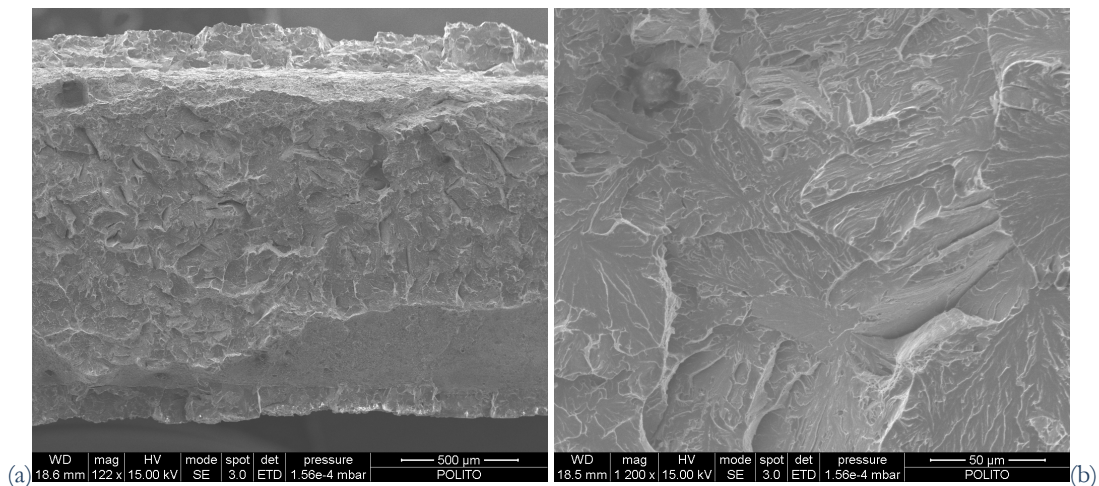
Fracture surfaces of TWIP/Mn-B welded joint with notch. Fracture in the interface between fusion zone and HAZ of Mn-B steels. Macroscopic (a) and microscopic (b) views.
